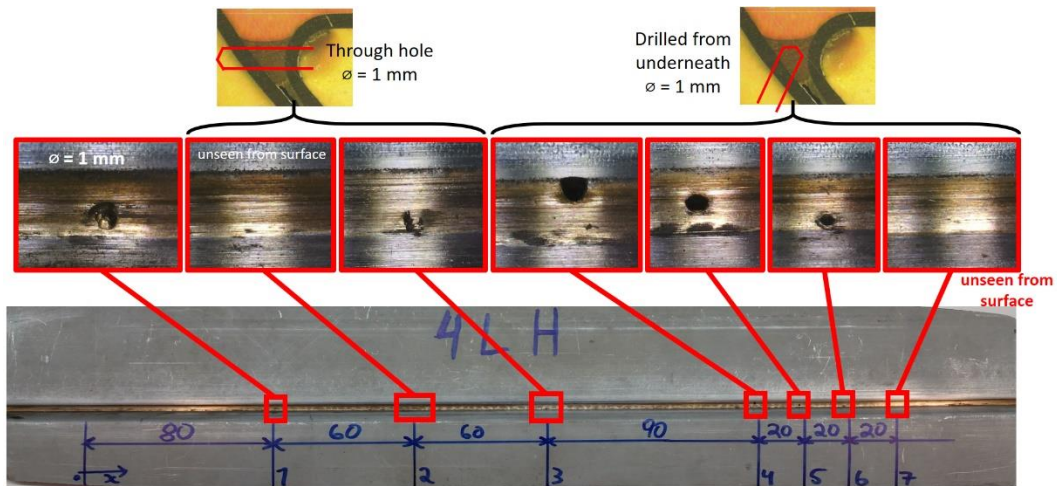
Sample 4LH with enlarged defects 1 to 7.
